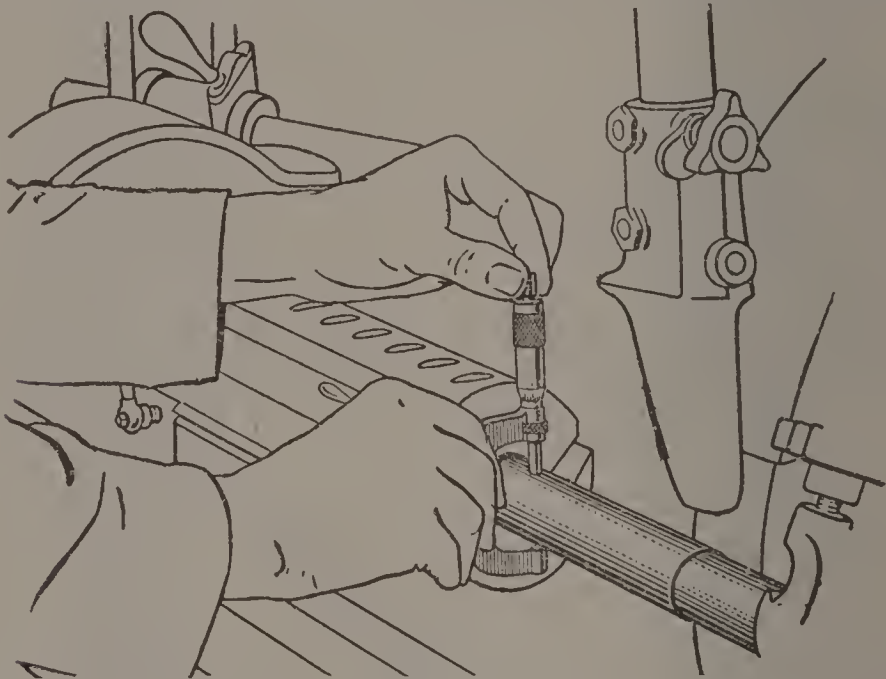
USING MICROMETER ON GRINDING MACHINE WORK
